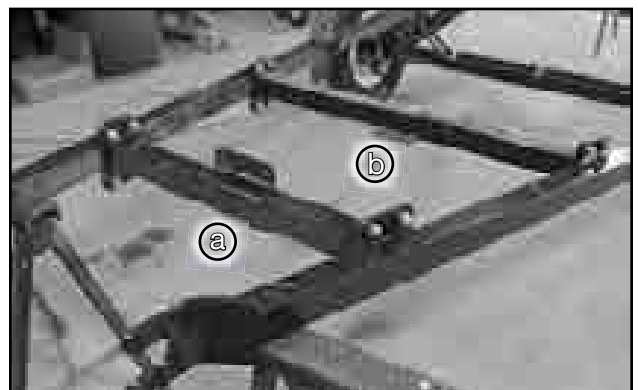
(a) Lift frame cross tube, (b) Hydraulic cross tube
